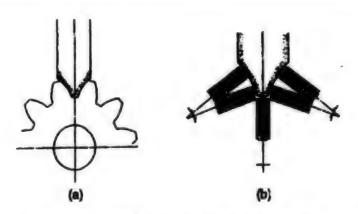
CBN Wheel CNC Dressing for Standard Shape Gear Grinding
